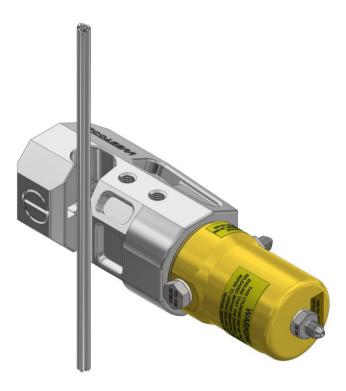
Example positioning of tool on the cut loop hydraulic line
